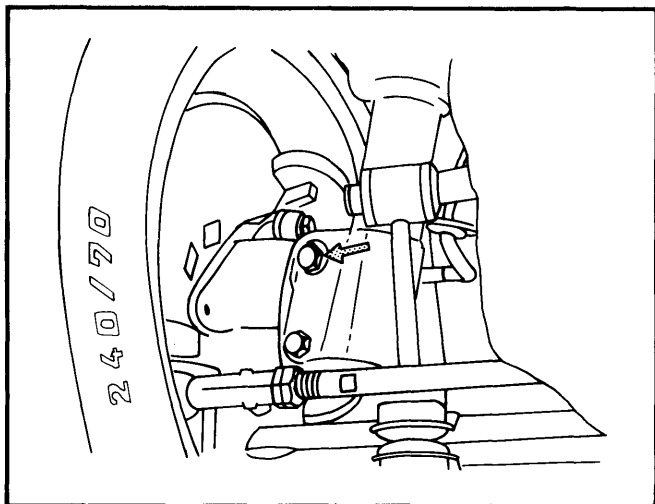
Eccentric Bolt for Camber Adjustment on 924 Models
